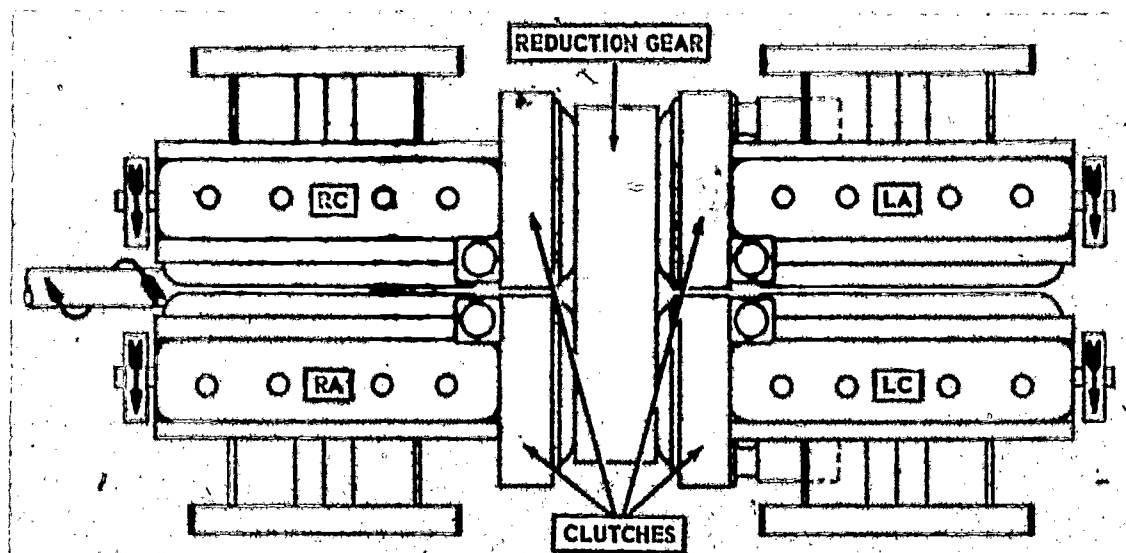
Four engines (quad unit) arranged to drive one propeller (GM 6-71).
